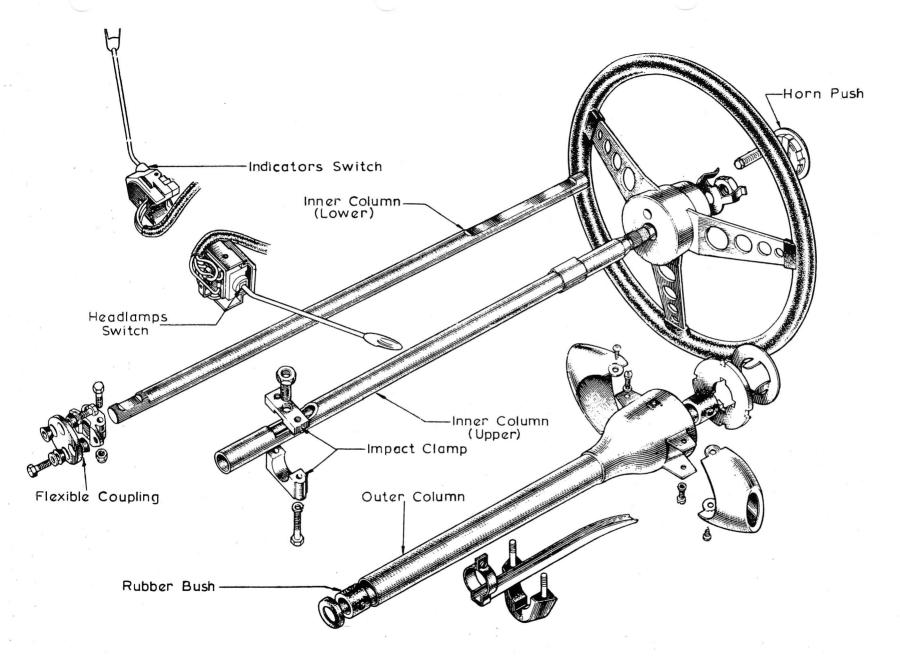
STEERING COLUMN (COLLAPSIBLE TYPE)
